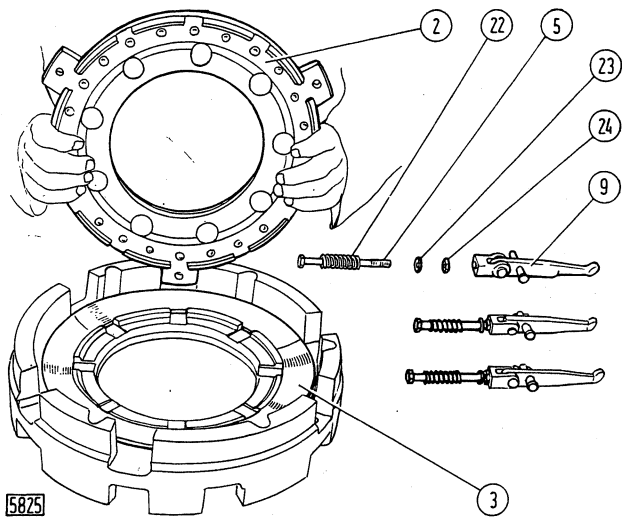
Assembly (disassembly) of the P.T.O. clutch.
